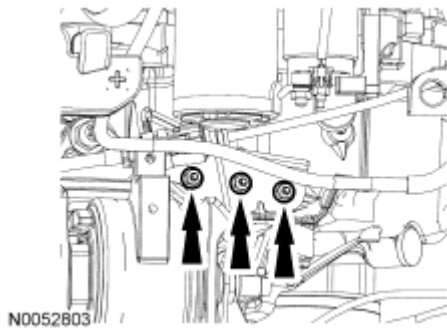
Identifying Selector Lever Cable Bracket Bolts & Nuts
